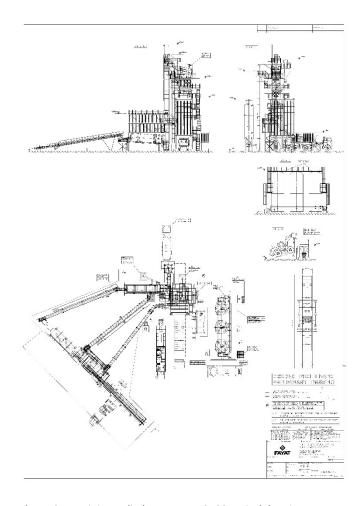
Marini-supplied Top Tower 2500 typical drawings.
